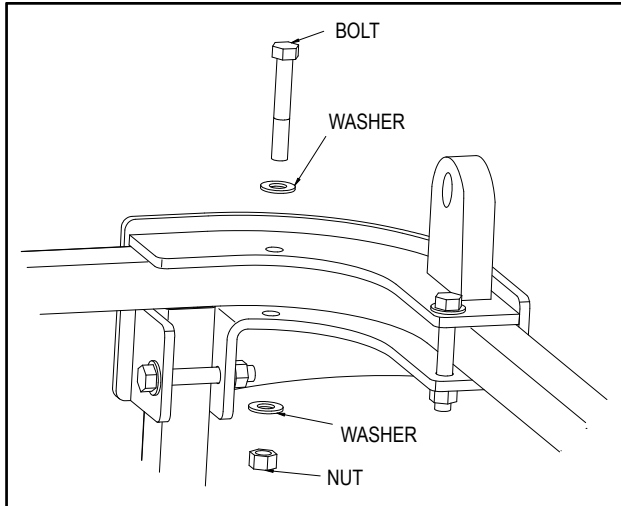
Bolt-On External Fall Arrest Cable Tension
